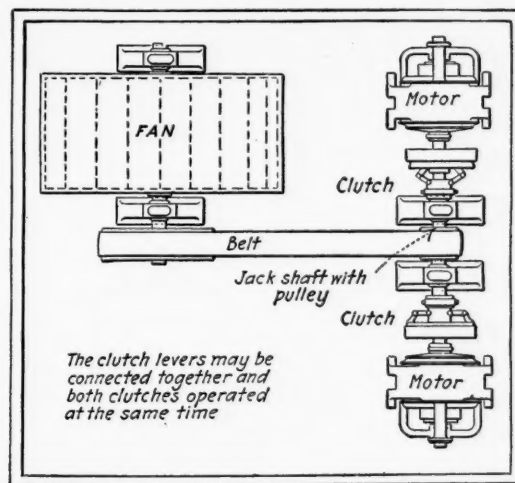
MOTORS BELTED TO A SINGLE INLET FAN
